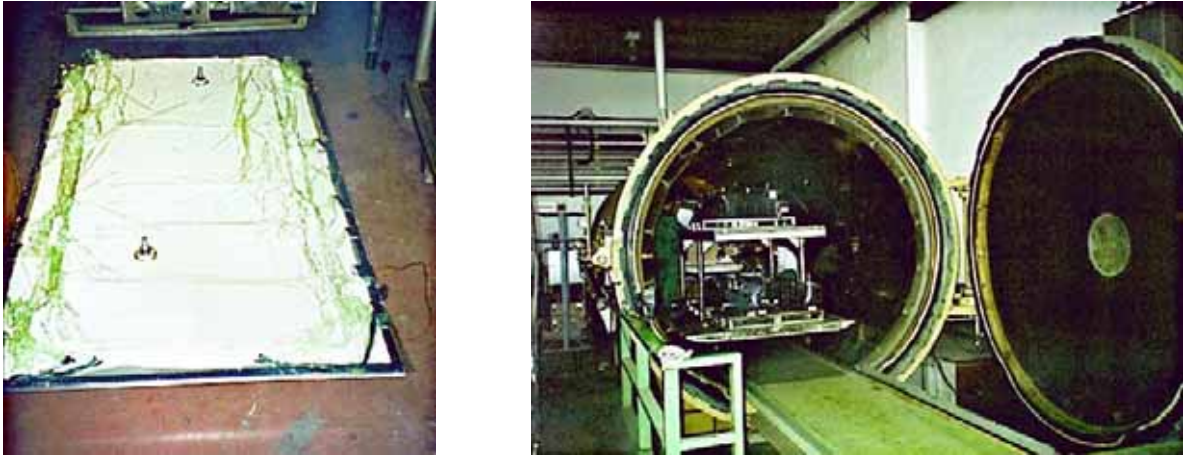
Mould in a vacuum bag before entering the autoclave which is shown open.
